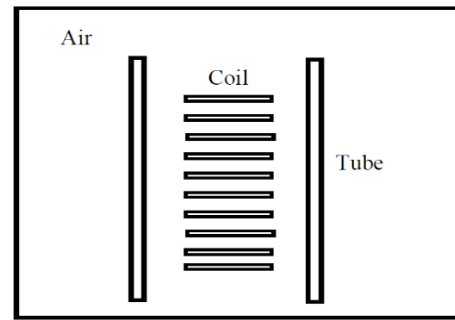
Forming Coil and Tubular Workpiece in Electromagnetic Forming.
